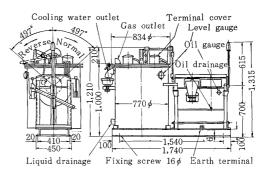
Outline of oil-immersed explosion-proof reversible liquid
